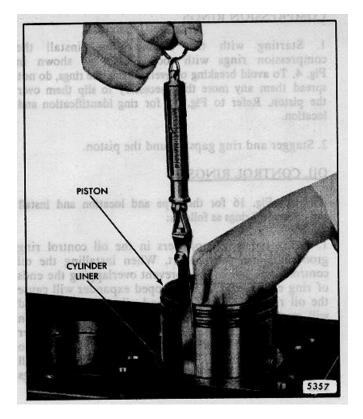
Measuring Piston-to-Liner Clearance using Tool J 5438-01
